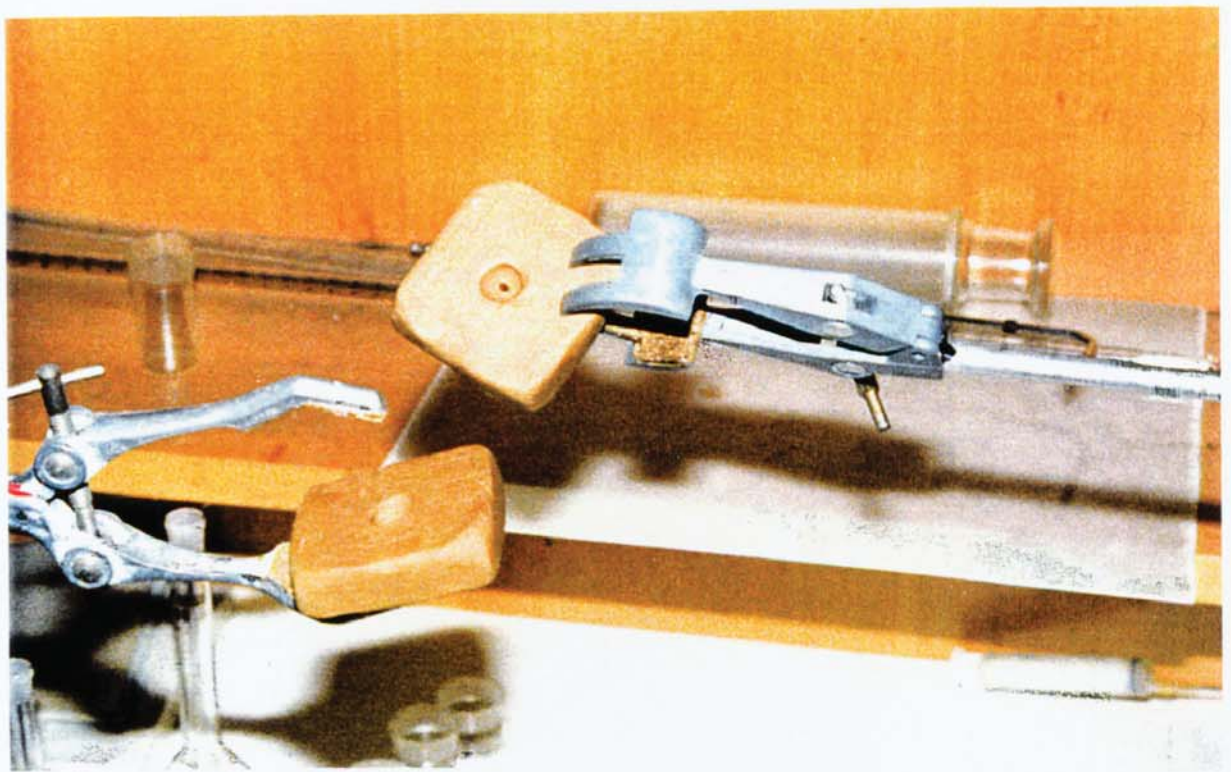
Naphthalene Moulding Assembly showing spruce hole.
